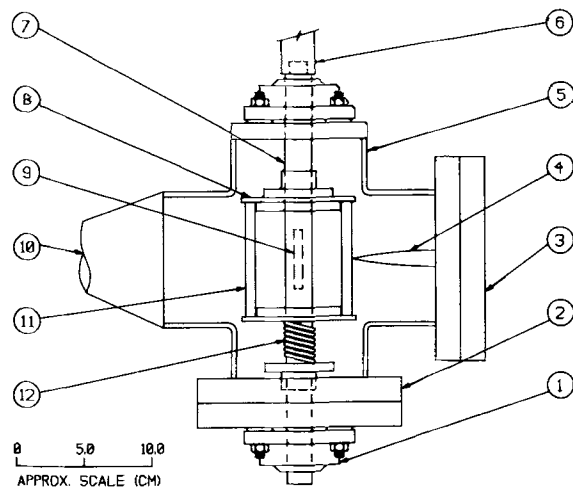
Furnace enclosure. (1) High-temperature bearing. (2) Flange-furnace door. (3) Coupling flange. (4) Plasma jet "flame." (5) Stainless steel cross. (6) Rotational coupling. (7) Specimen support rod. (8) Specimen support collar. (9) Quenchant inlet. (10) To vent and drain. (11) Cylindrical specimen. (12) Spring-compression.
